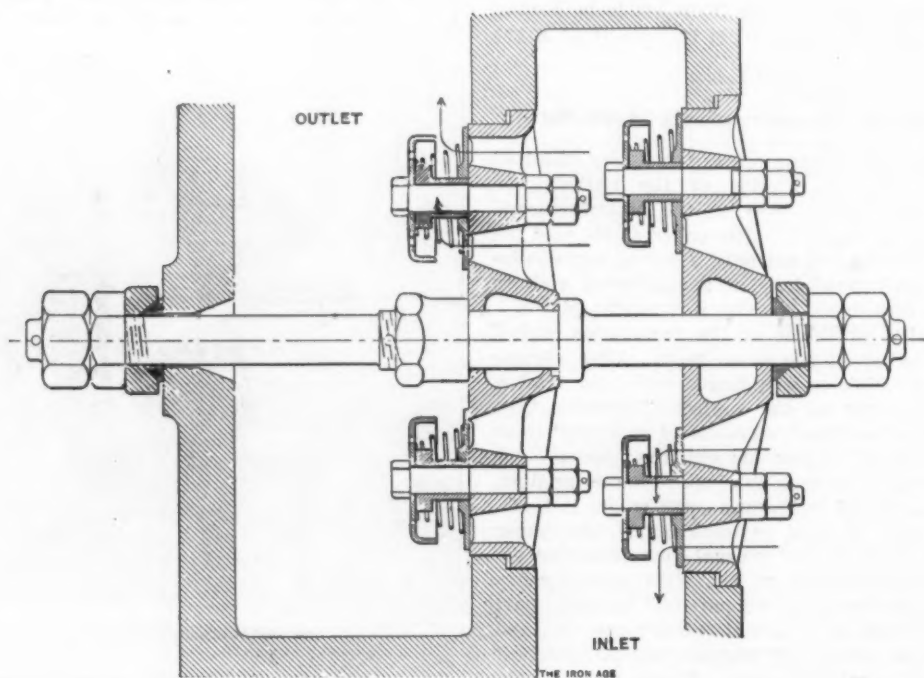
Spring Loaded Disk Type of Valve Used on the Air Cylinder of the Cockerill Gas Driven Blowing Engines.
